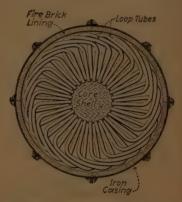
Cross section of Morrin boiler, showing method of looping the tubes.
